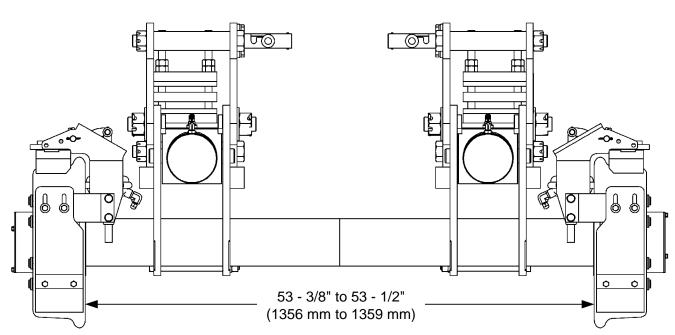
GUIDE WHEEL BACK FLANGE GAUGE
